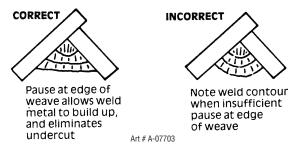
Examples of Vertical Fillet Welds
